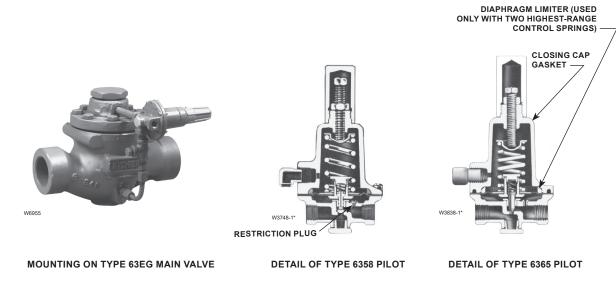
Typical Pressure Relief or Backpressure Pilot Constructions
